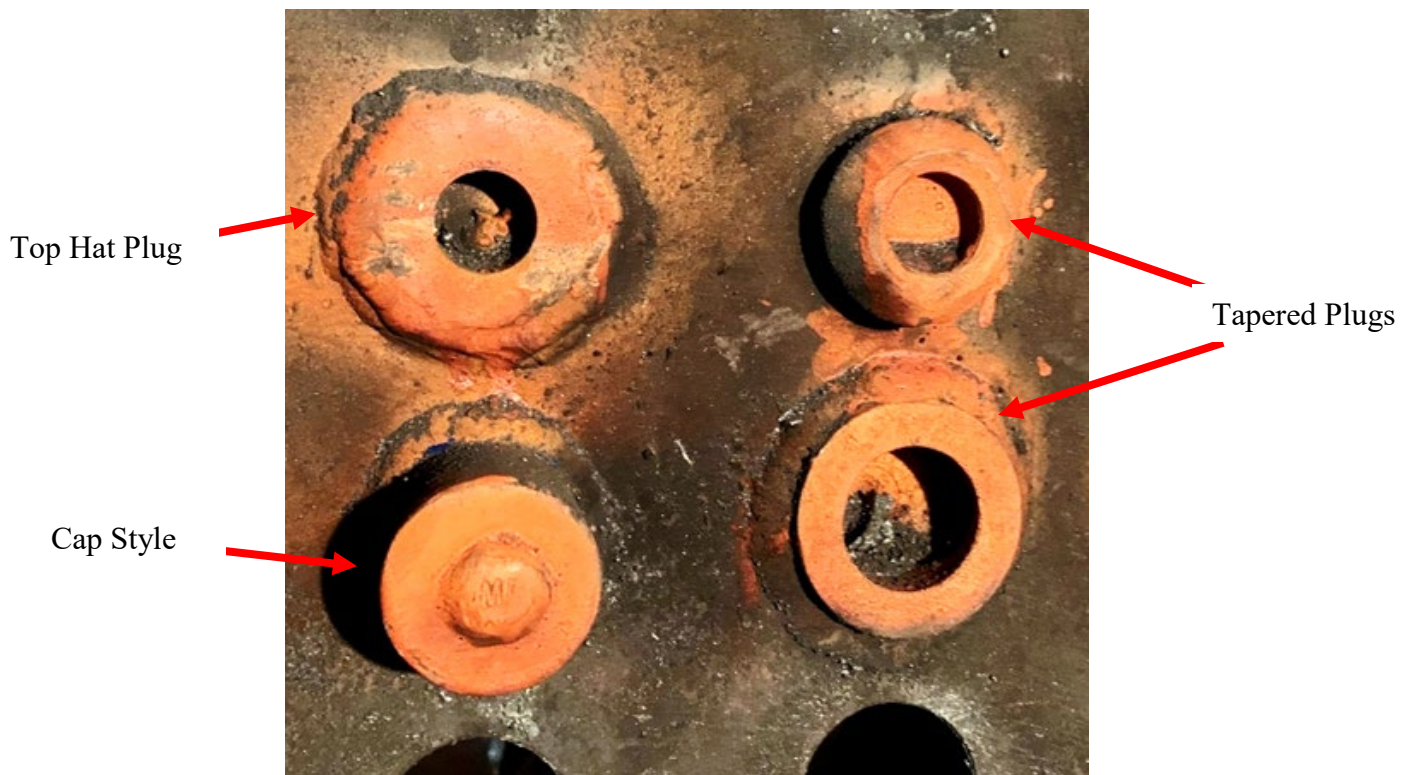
Several Types of Plugs Seal Welded Directly to the Drum Shell
